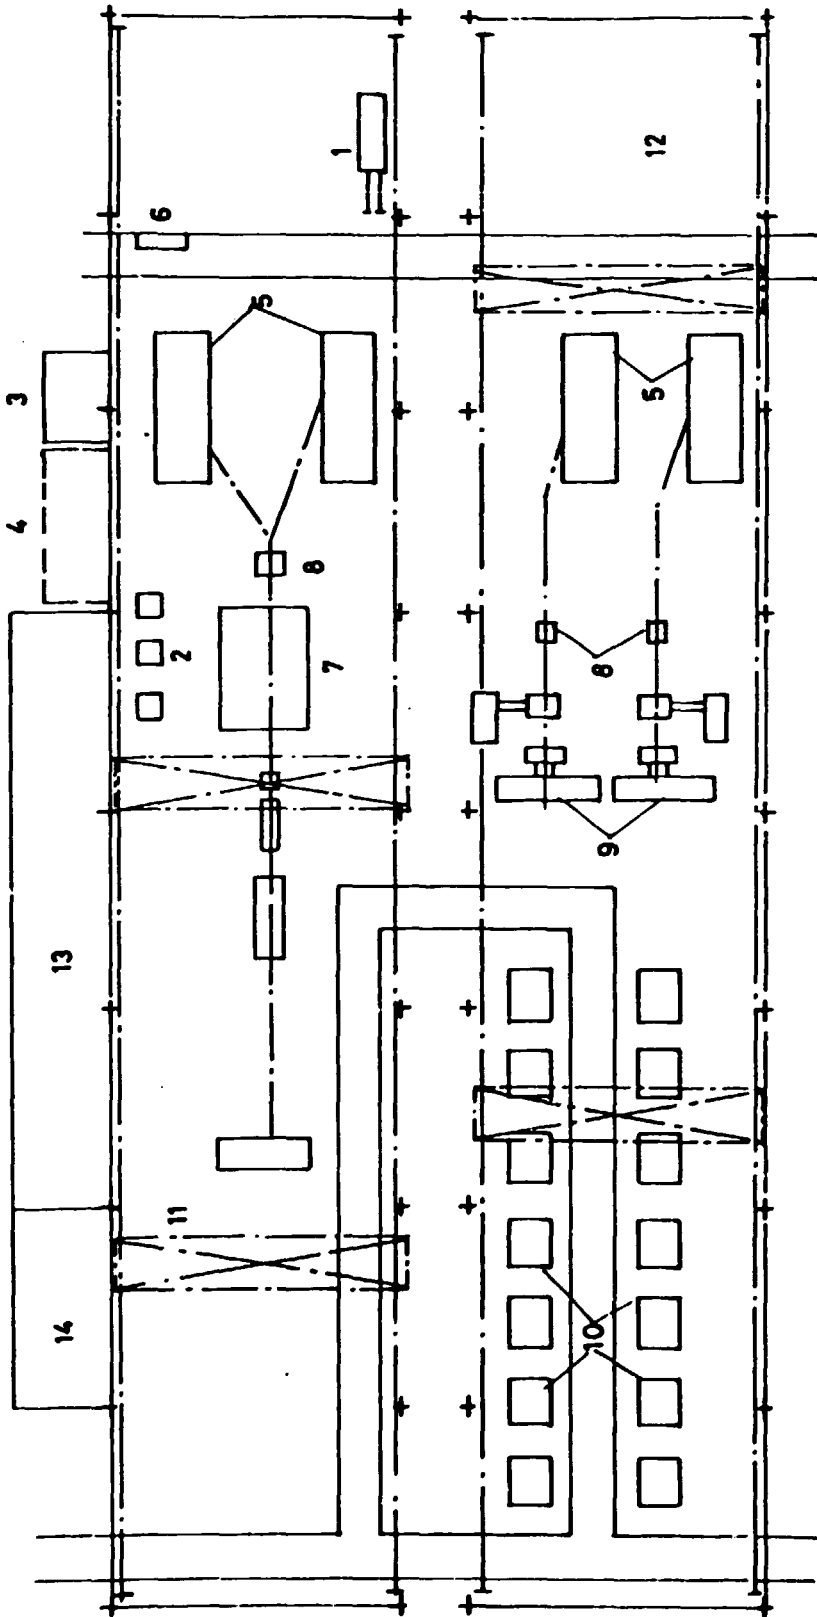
Casting shop with continuous casters for wide strip and wire rod (wide strip: 25 000 tpy; wire rod 20 000 tpy)
